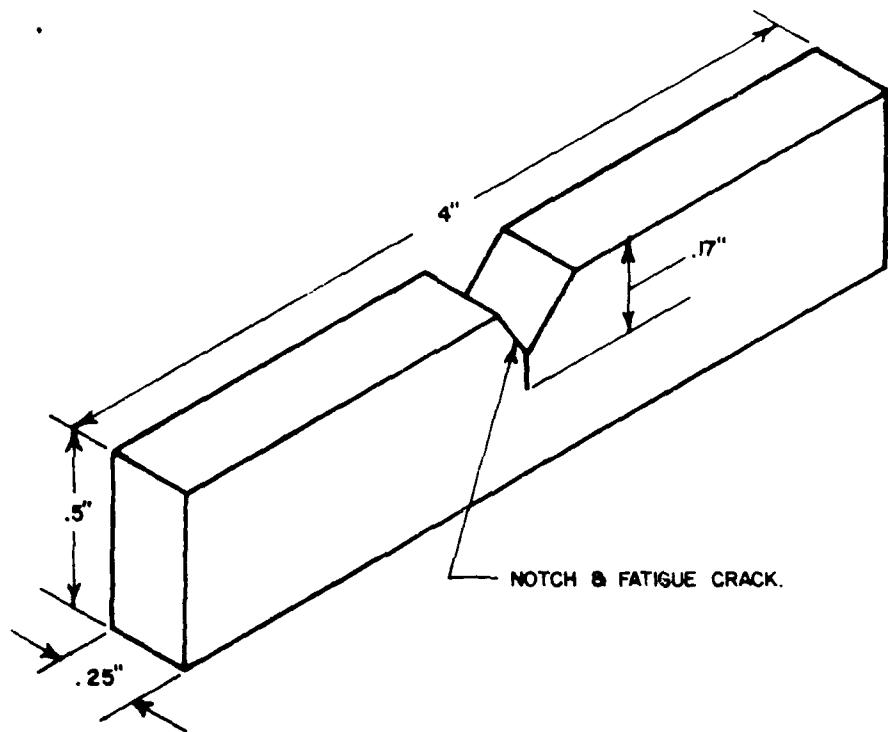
STRESS CORROSION CRACKING TEST SPECIMEN.
